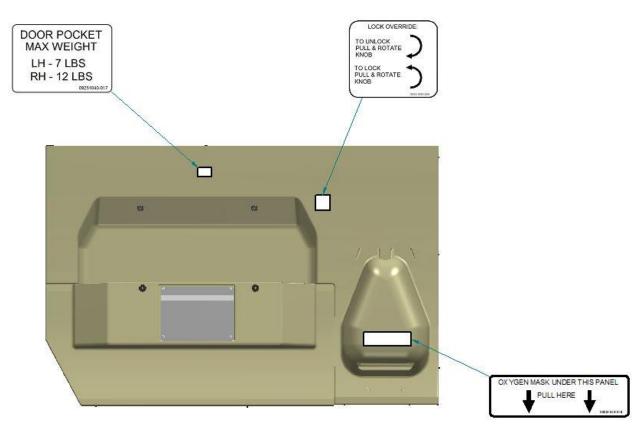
Co-Pilot Lower Door Panel Assembly – P/N 09251030-002
